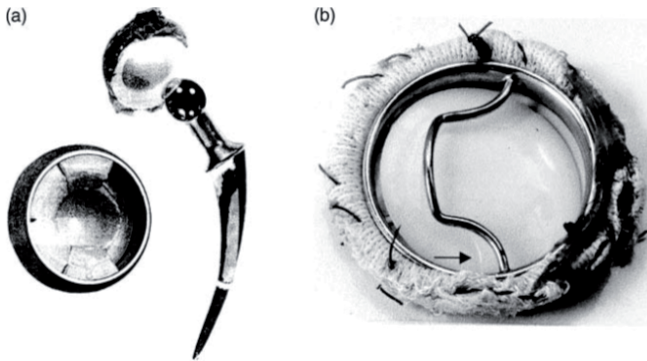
Some examples of fatigue failure of medical devices: (a) hip prosthesis; (b) explanted Björk-Shiley polyacetal disc mechanical heart valve (arrow indicates fatigue-wear mark) [1].
